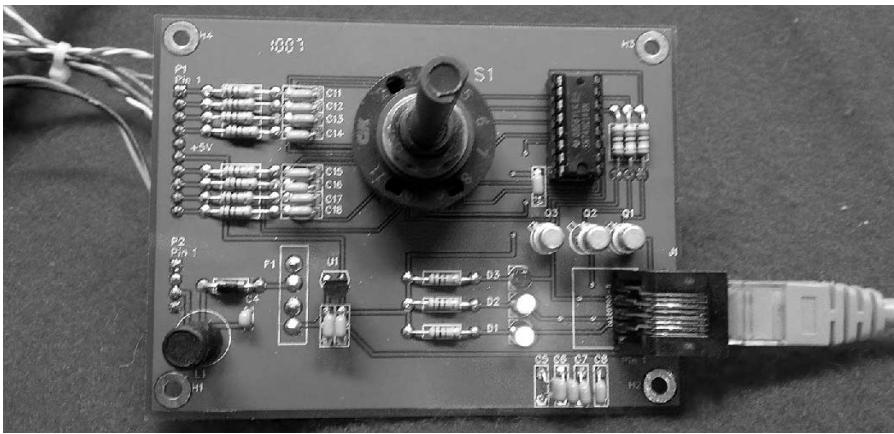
The antenna selector system's remote controller printed circuit board.
